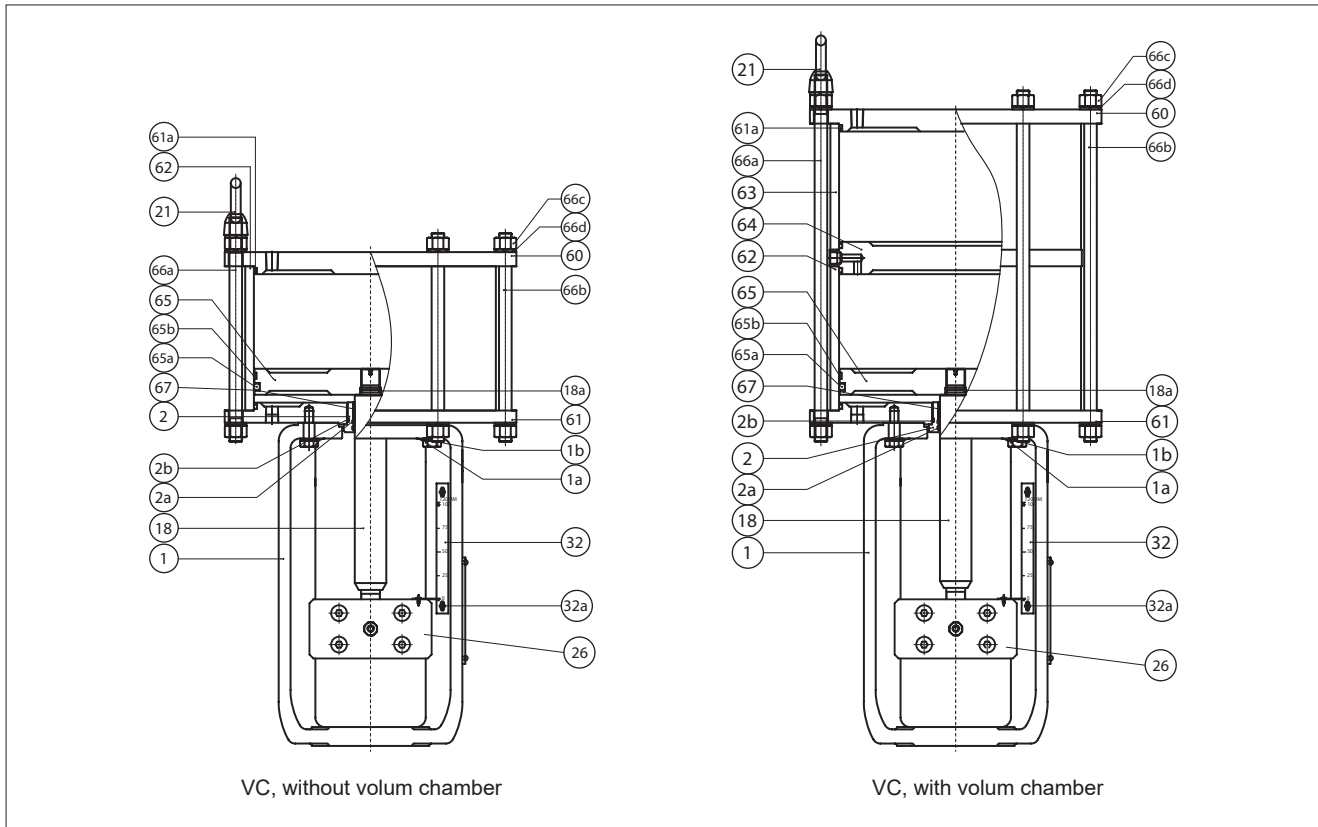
VC Actuator Constructions without Handwheel (See page 7, Parts list for Fig.5)
